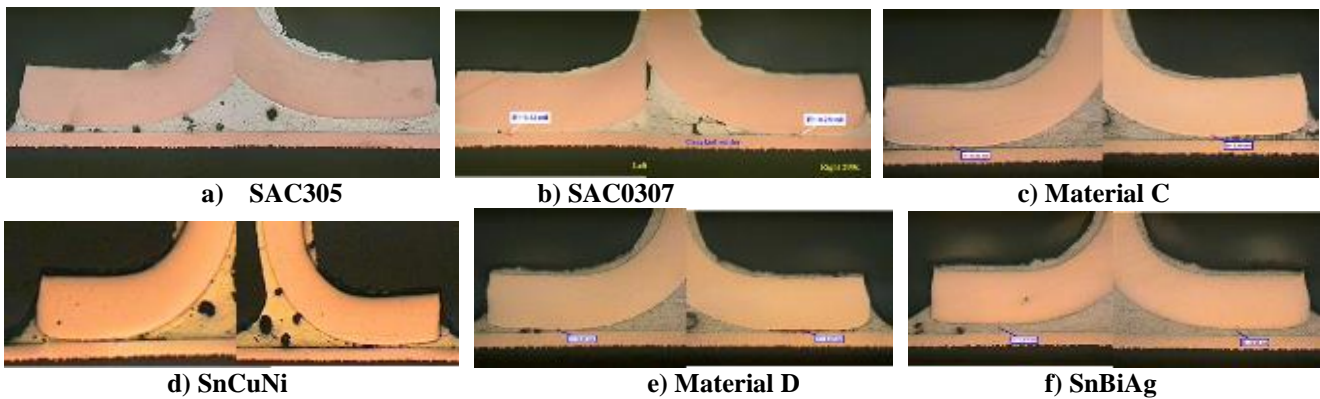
Cross section images of QFN solder joint assembled using different Pb-free alloy solder pastes after thermal cycle testing. a) SAC305; b) SAC0307; c) Material C; d) SnCuNi; e) Material D; f) SnBiAg
